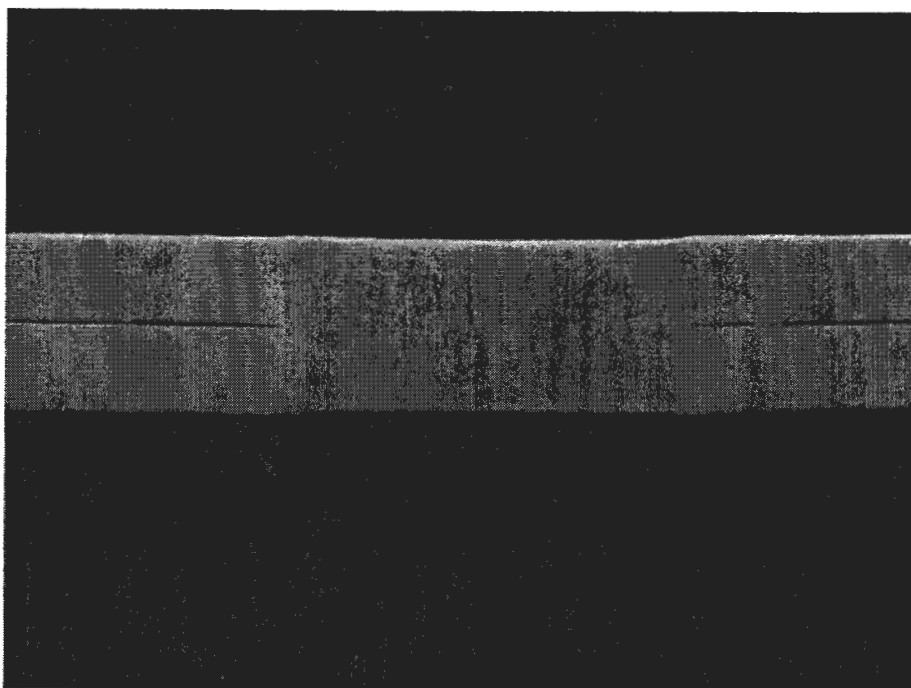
Macrograph of a typical improved spot weld tensile shear specimen; magnified 9×, etchant: 1% nital.
